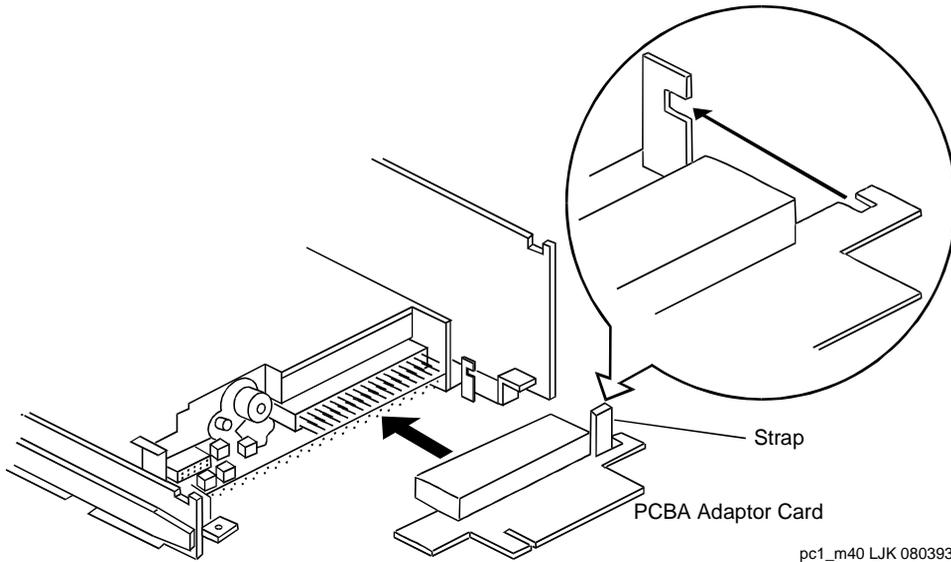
Diskette Drive Unit PCBA 5-Inch Adapter Card
